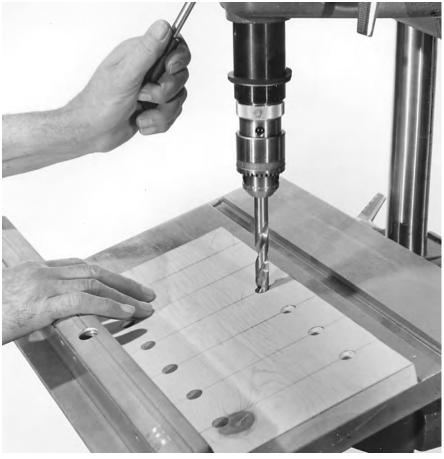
You can relocate a hole or enlarge one already drilled if you first seal it with a plug so you can center the bit for the new hole.
